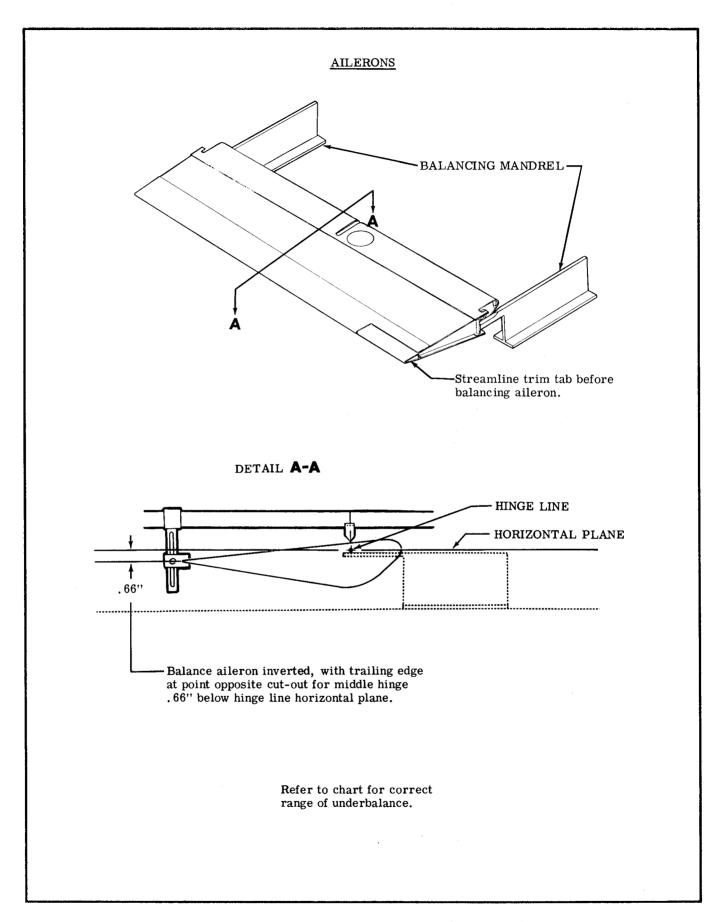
Control Surface Balancing (Sheet 3 of 4)
